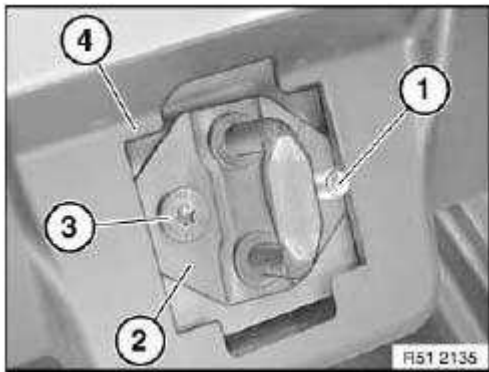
Threaded Pin, Striker And Rear Lid Panel
